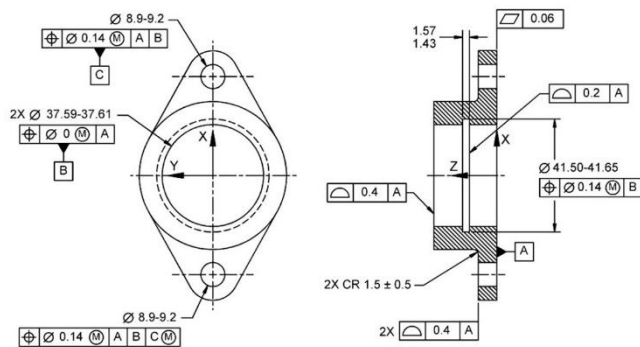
Example of tolerancing information on a 2D drawing
